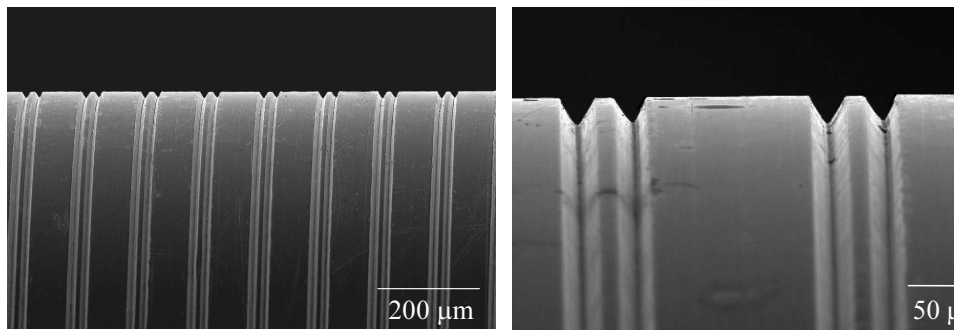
A portion of the PEEK workpiece machined using the focused ion beam shaped, two-tip tool shown in Fig. 2.7.
